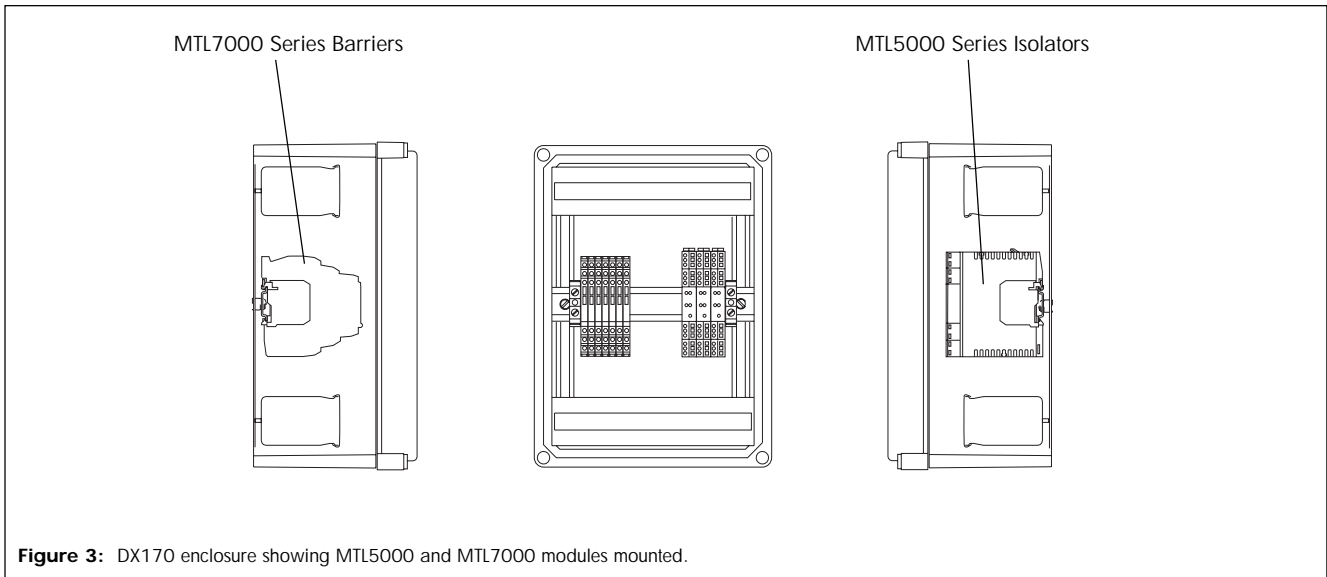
DX170 enclosure showing MTL5000 and MTL7000 modules mounted.
